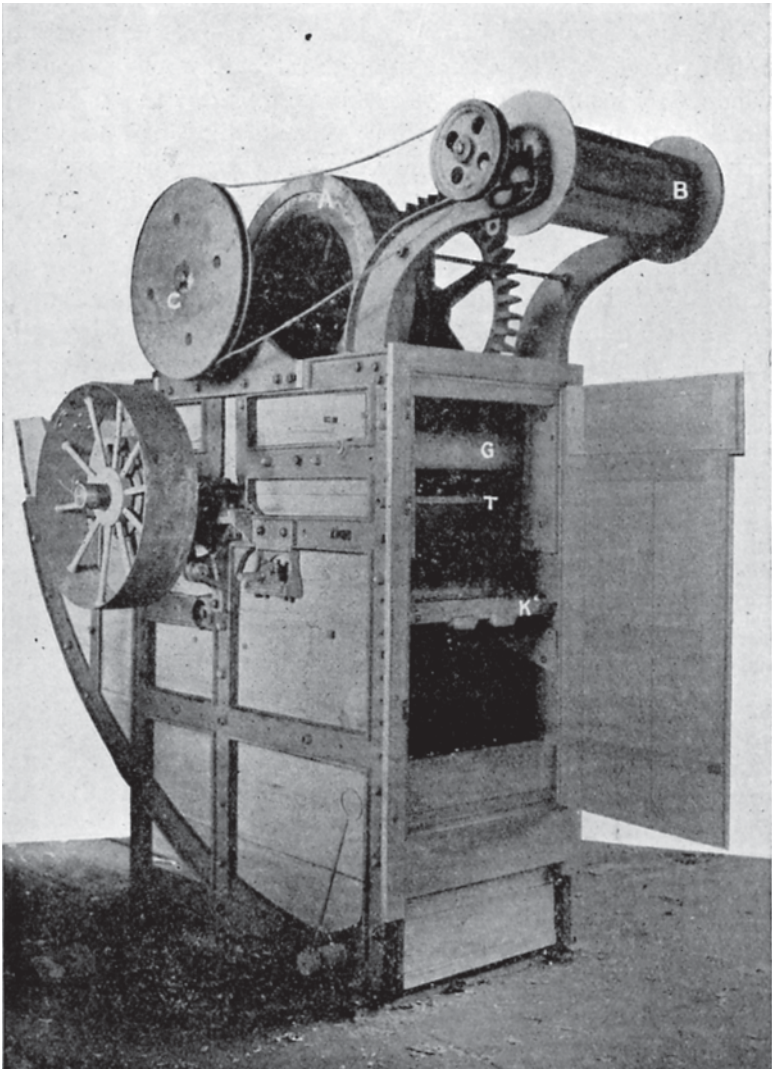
Kilburn's Scouring Machine for Heavy Pieces.
